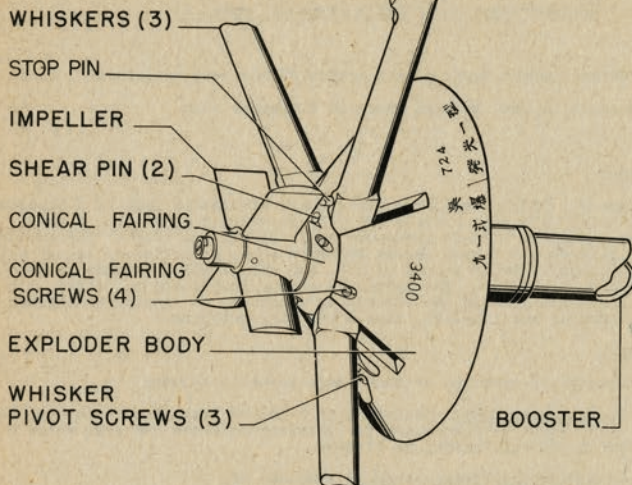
Type 91, Model 1 Exploder, Elevation
